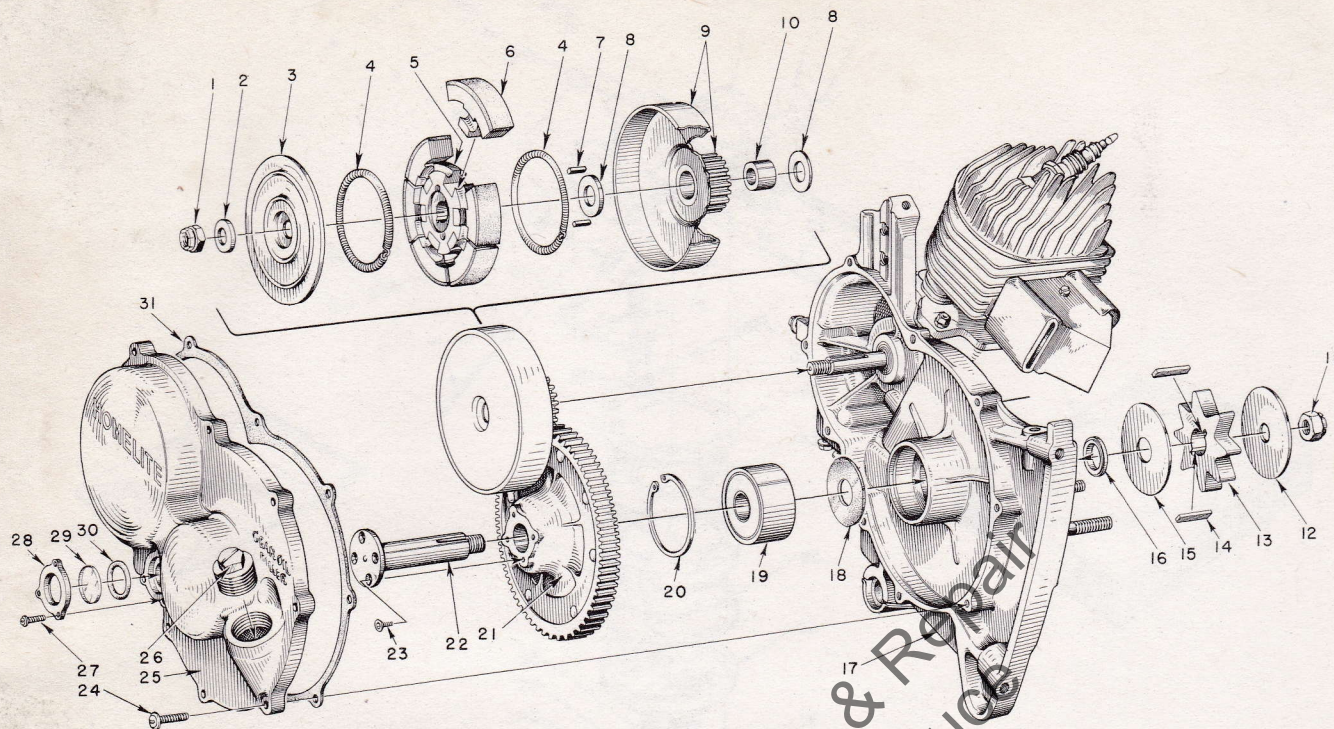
GEAR CASE AND SPROCKET PARTS
